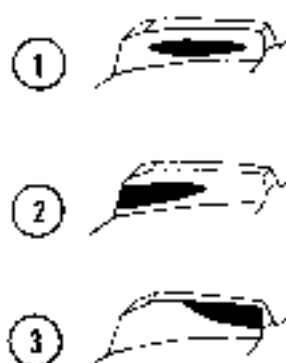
Mesh pattern on bevel ring gear teeth. (1) is correct tooth bearing; (2) bevel pinion is too close to same center; (3) bevel pinion is too far from same center.
